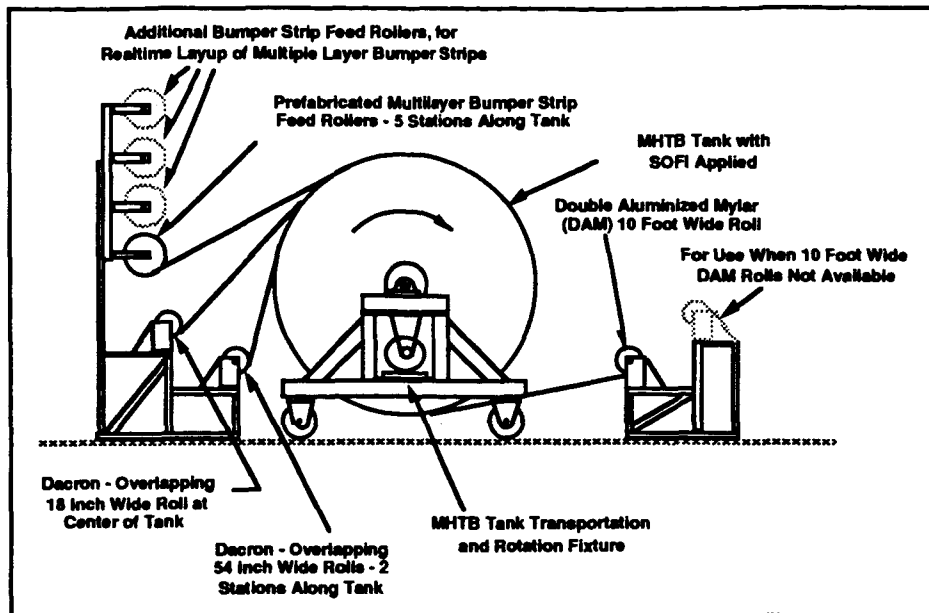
Roll Wrap Tooling, Front View - as Planned at CDR
